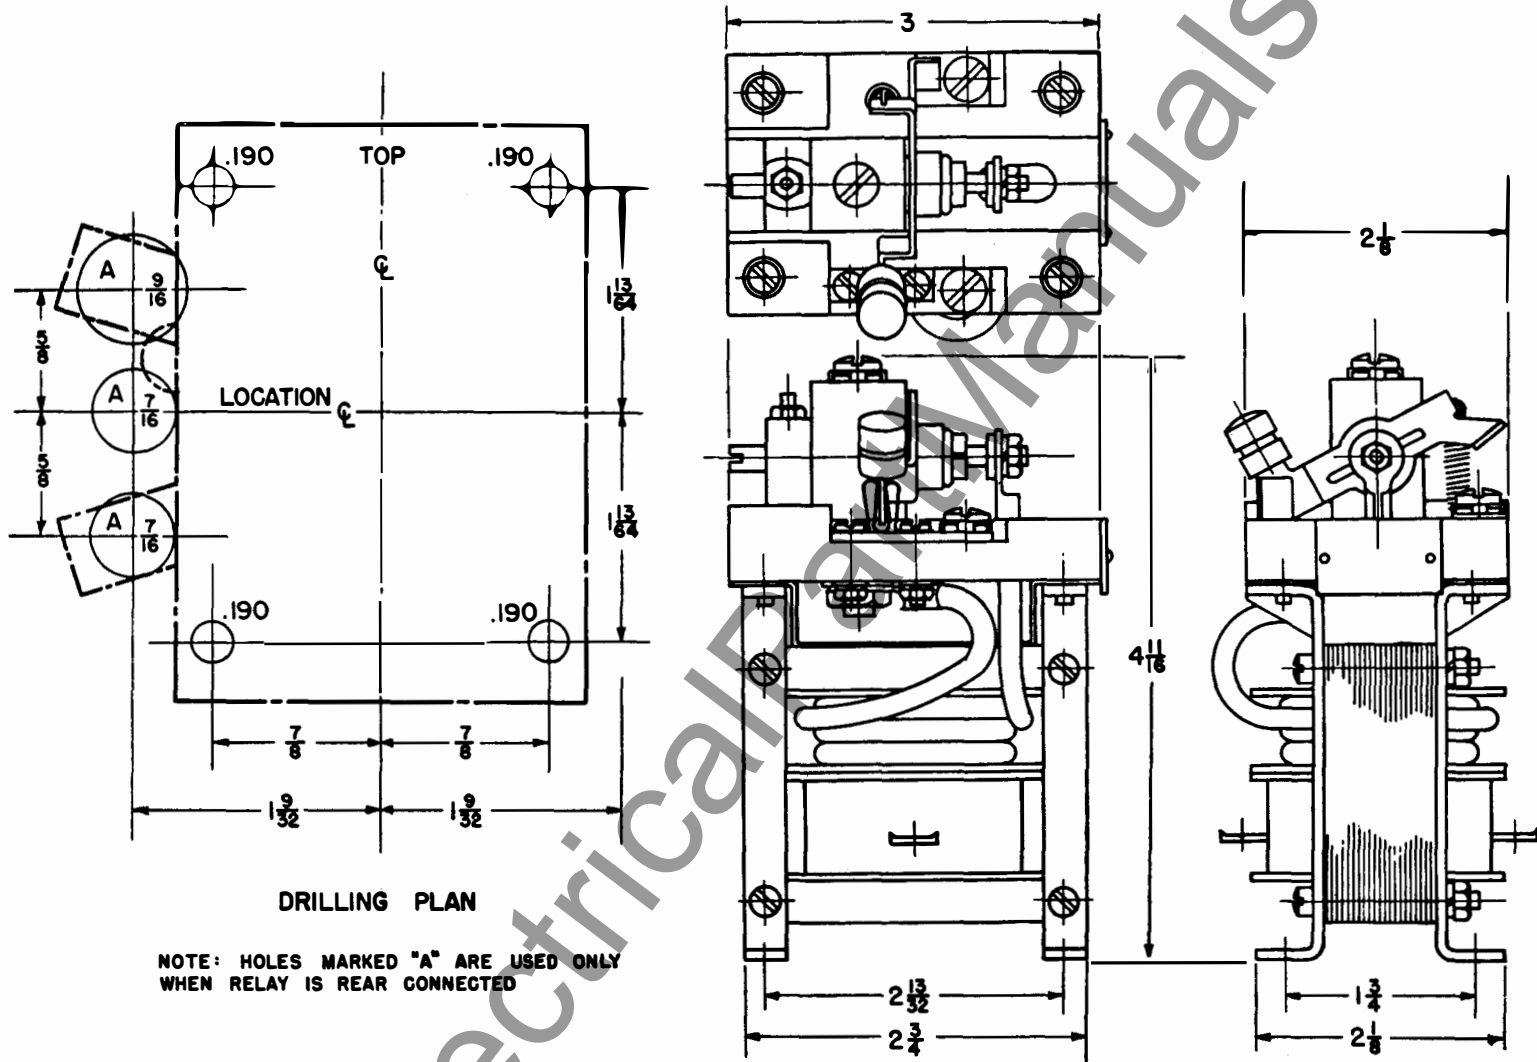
Outline Dimensions in Inches and Drilling Plan for Type DP Damper Protective Relay.
